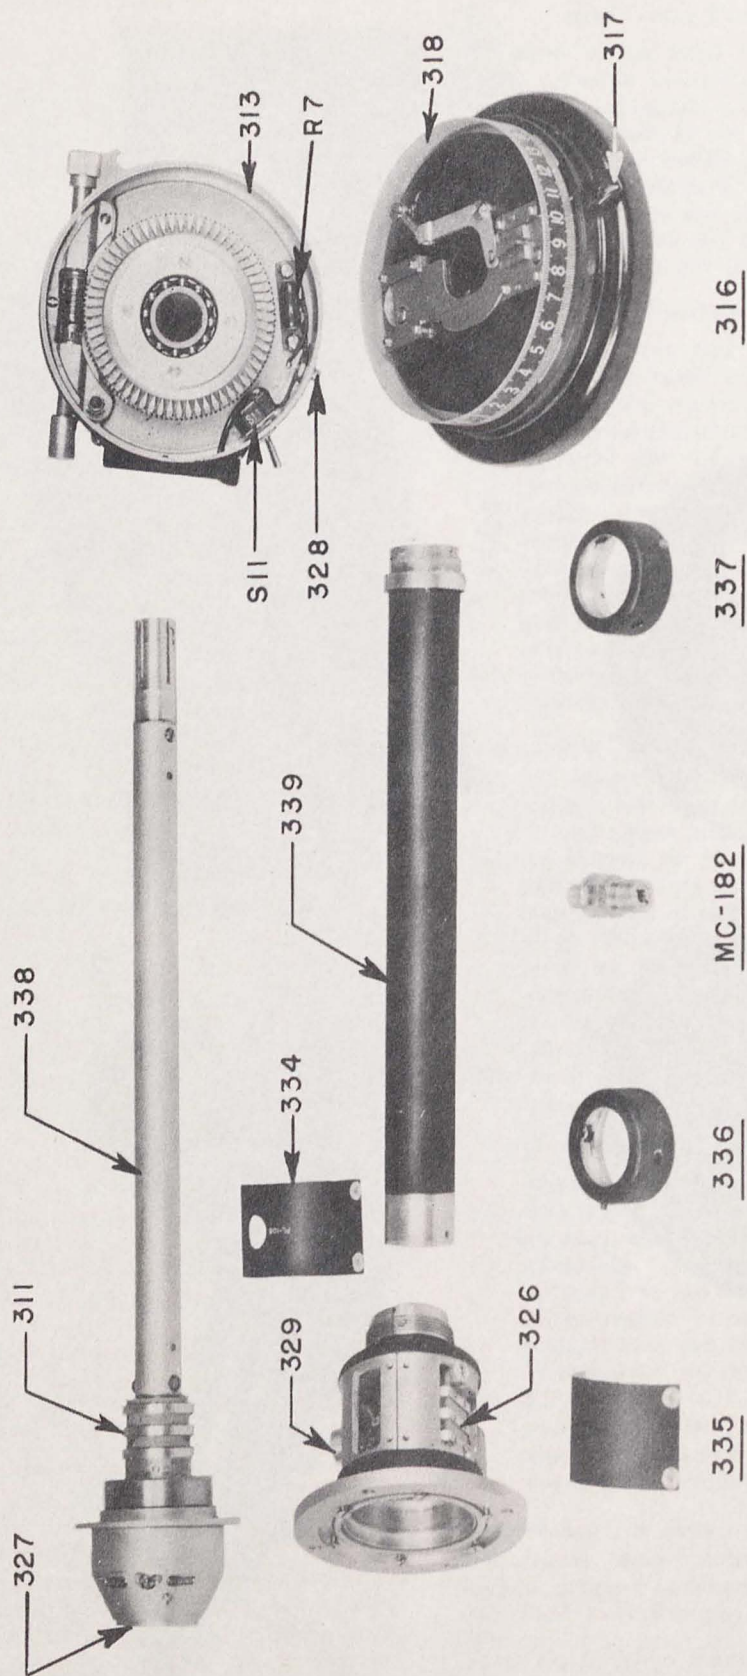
LOOP MOUNTING GS-8-B, EXPLODED VIEW
